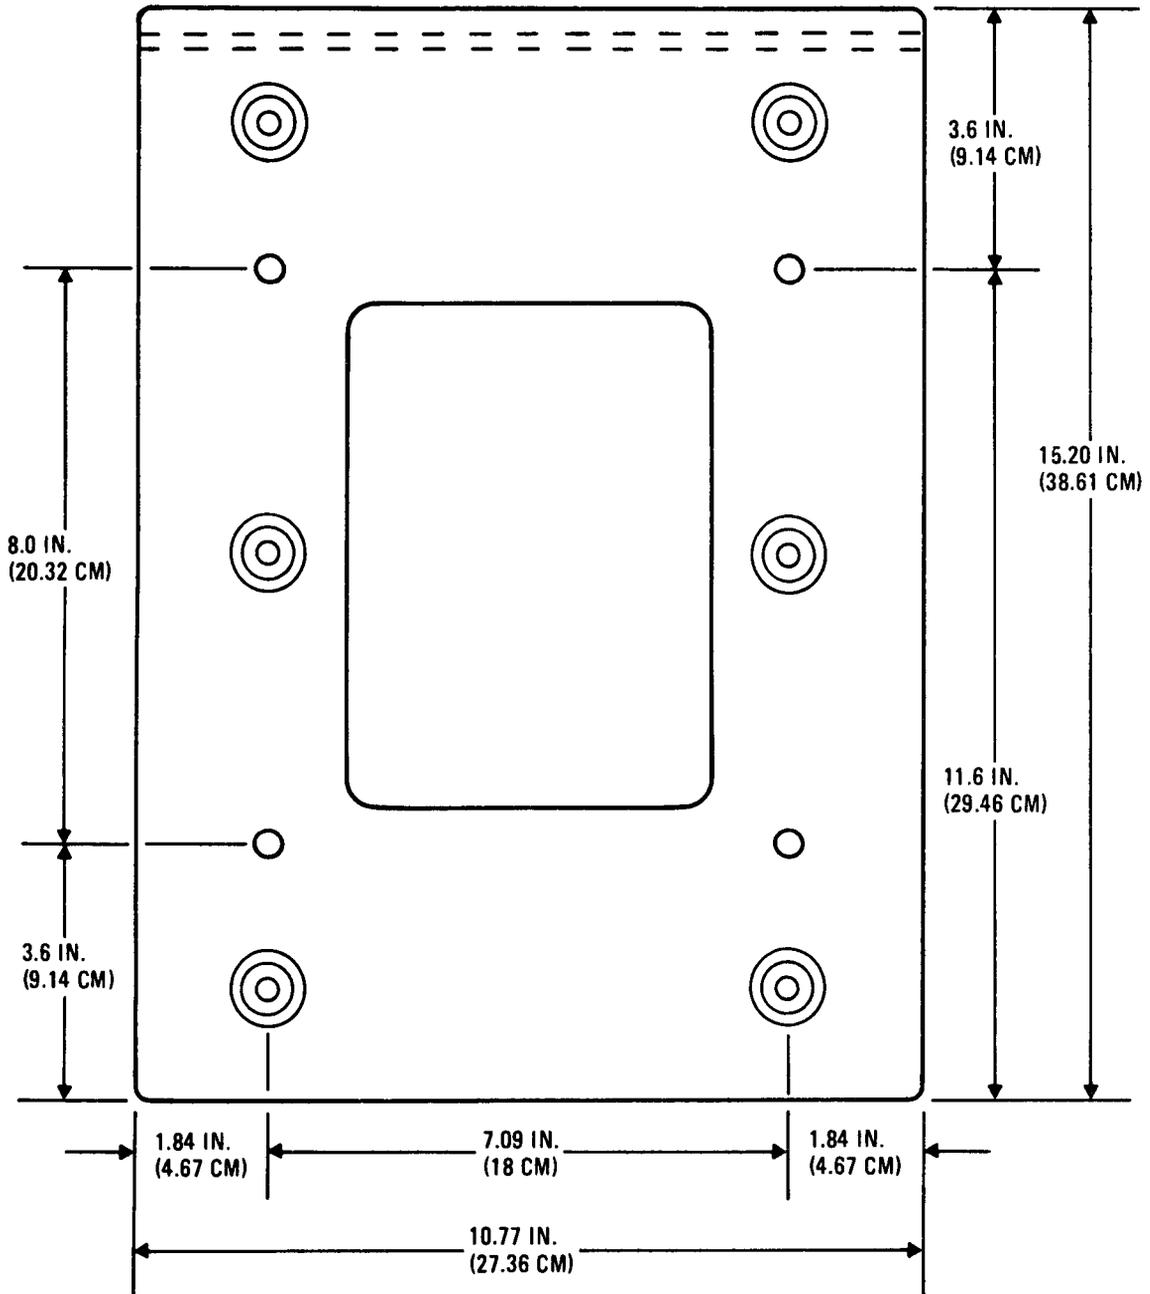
, Antenna Coupler Mount MT-4495/GRC-193 Lower Tray Assembly Dimensional Data
